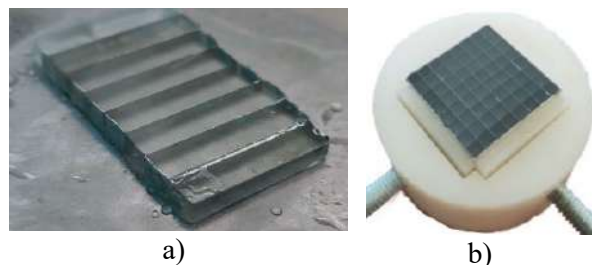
The manufacturing process of the detector assembly. a) a sliced plate, b) a finished matrix detector 8x8 pixels 3x3x20 mm
